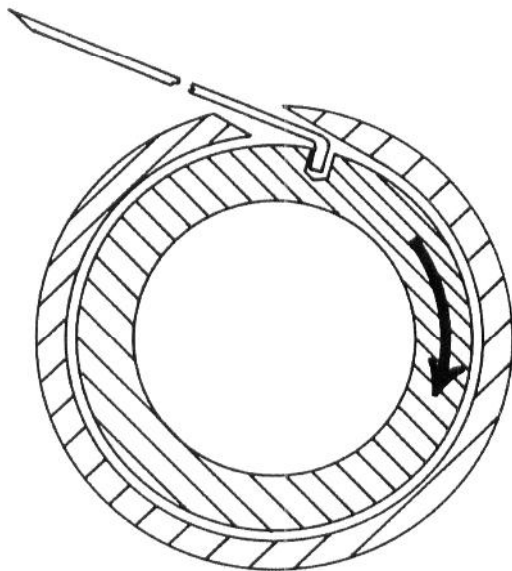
Installing Wire Retaining Ring to Secure Bearing
